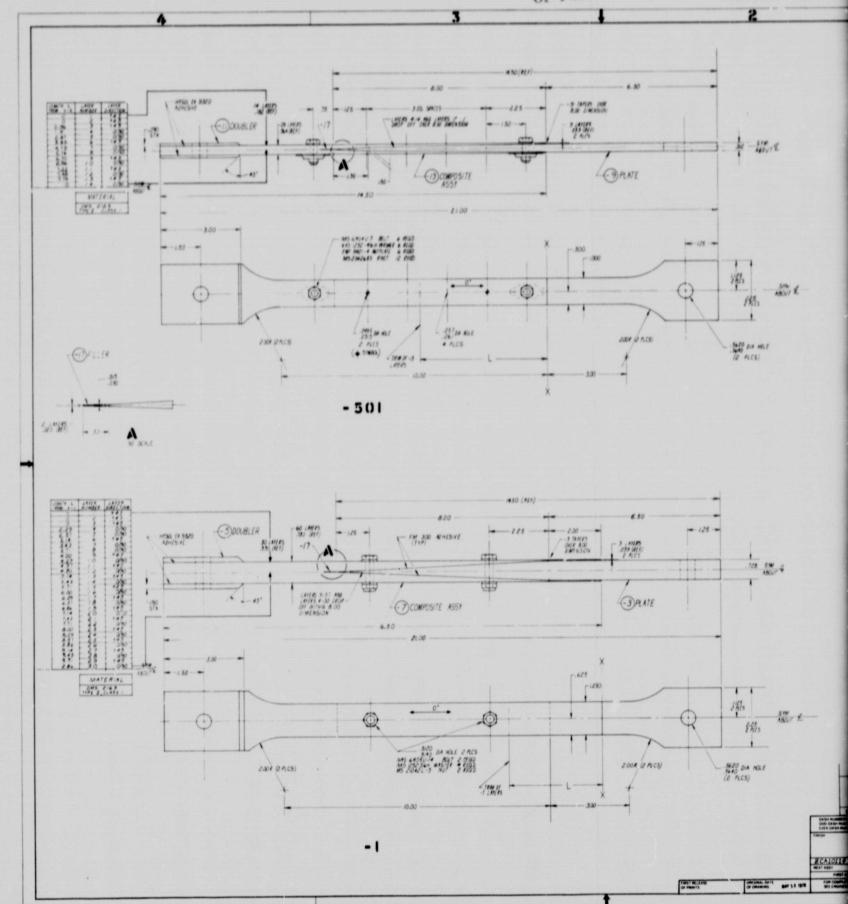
DRAWING Z5943445 — SPECIMEN ASSY — COVER PANEL, COMBINED SHEAR AND COMPRESSION (SHEET 2 CONCLUDED)
